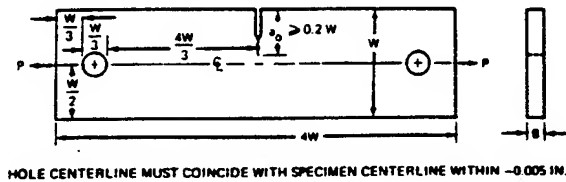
Single Edge Notch Tensile (SENT) Specimen.
